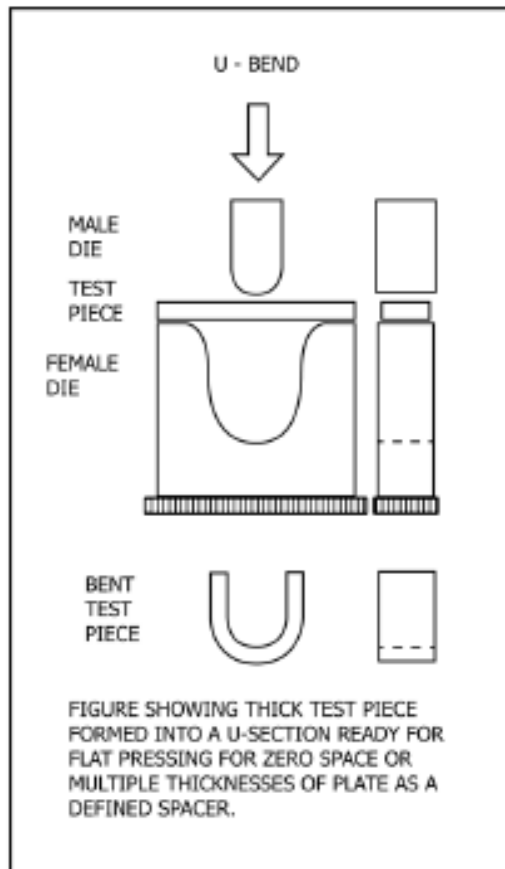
Schematic Fixture for the Guided Bend, U-bend Test
